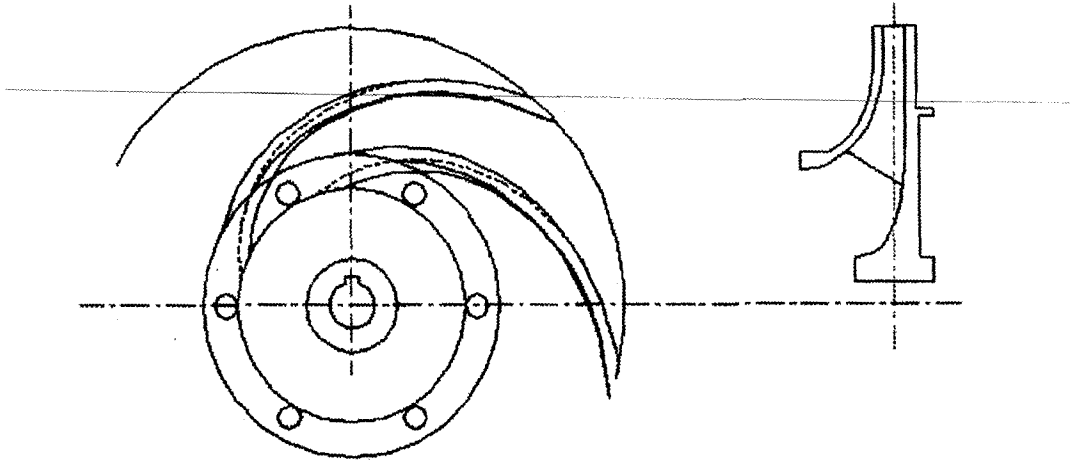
A Cad Drawing of a centrifugal pump impeller.
